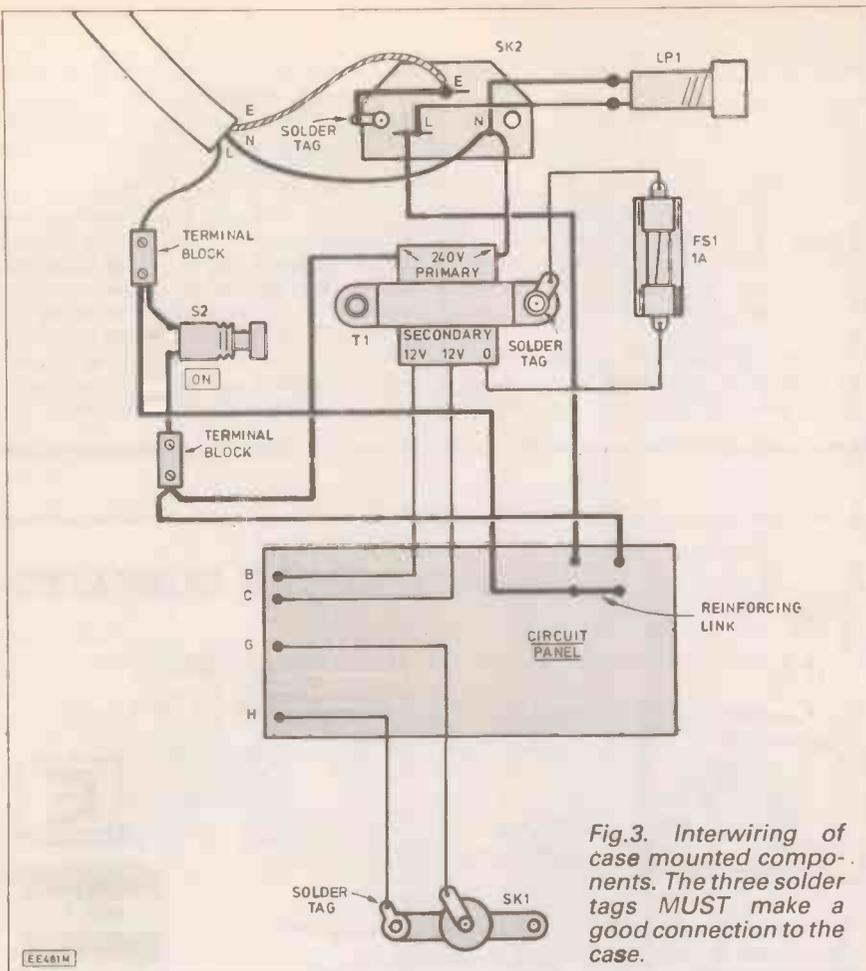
Interwiring of case mounted components. The three solder tags MUST make a good connection to the case.
